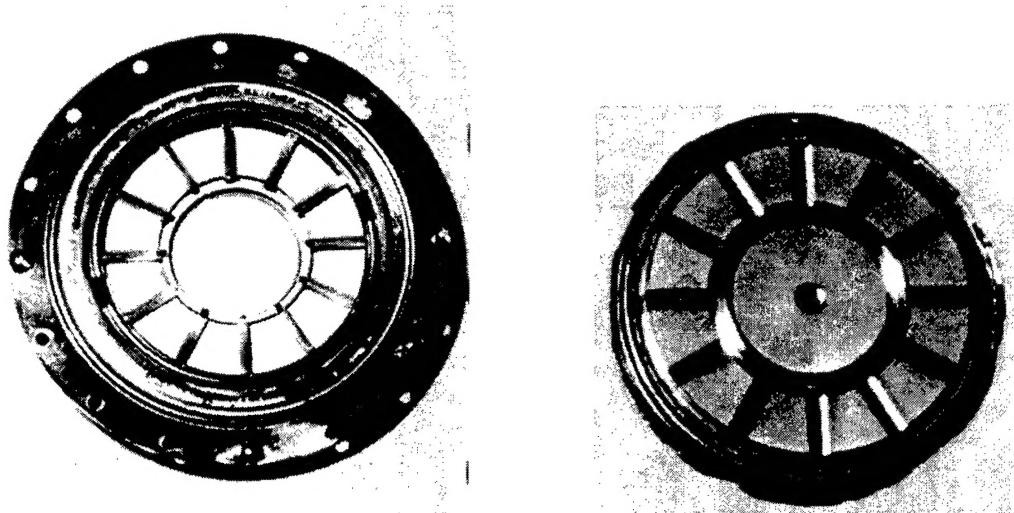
View of the Package After the Cathode Electrode (shown to the right) has been Removed.
